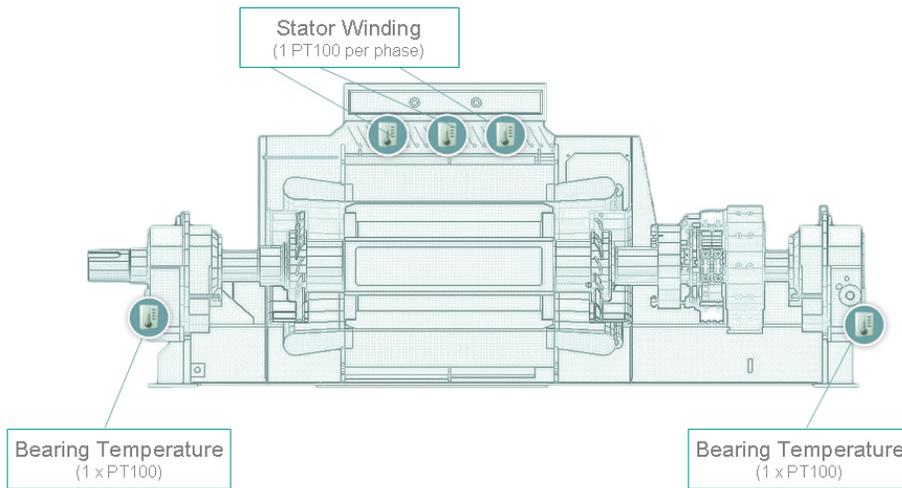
Application with 5 temperature sensors for stator windings and bearings
